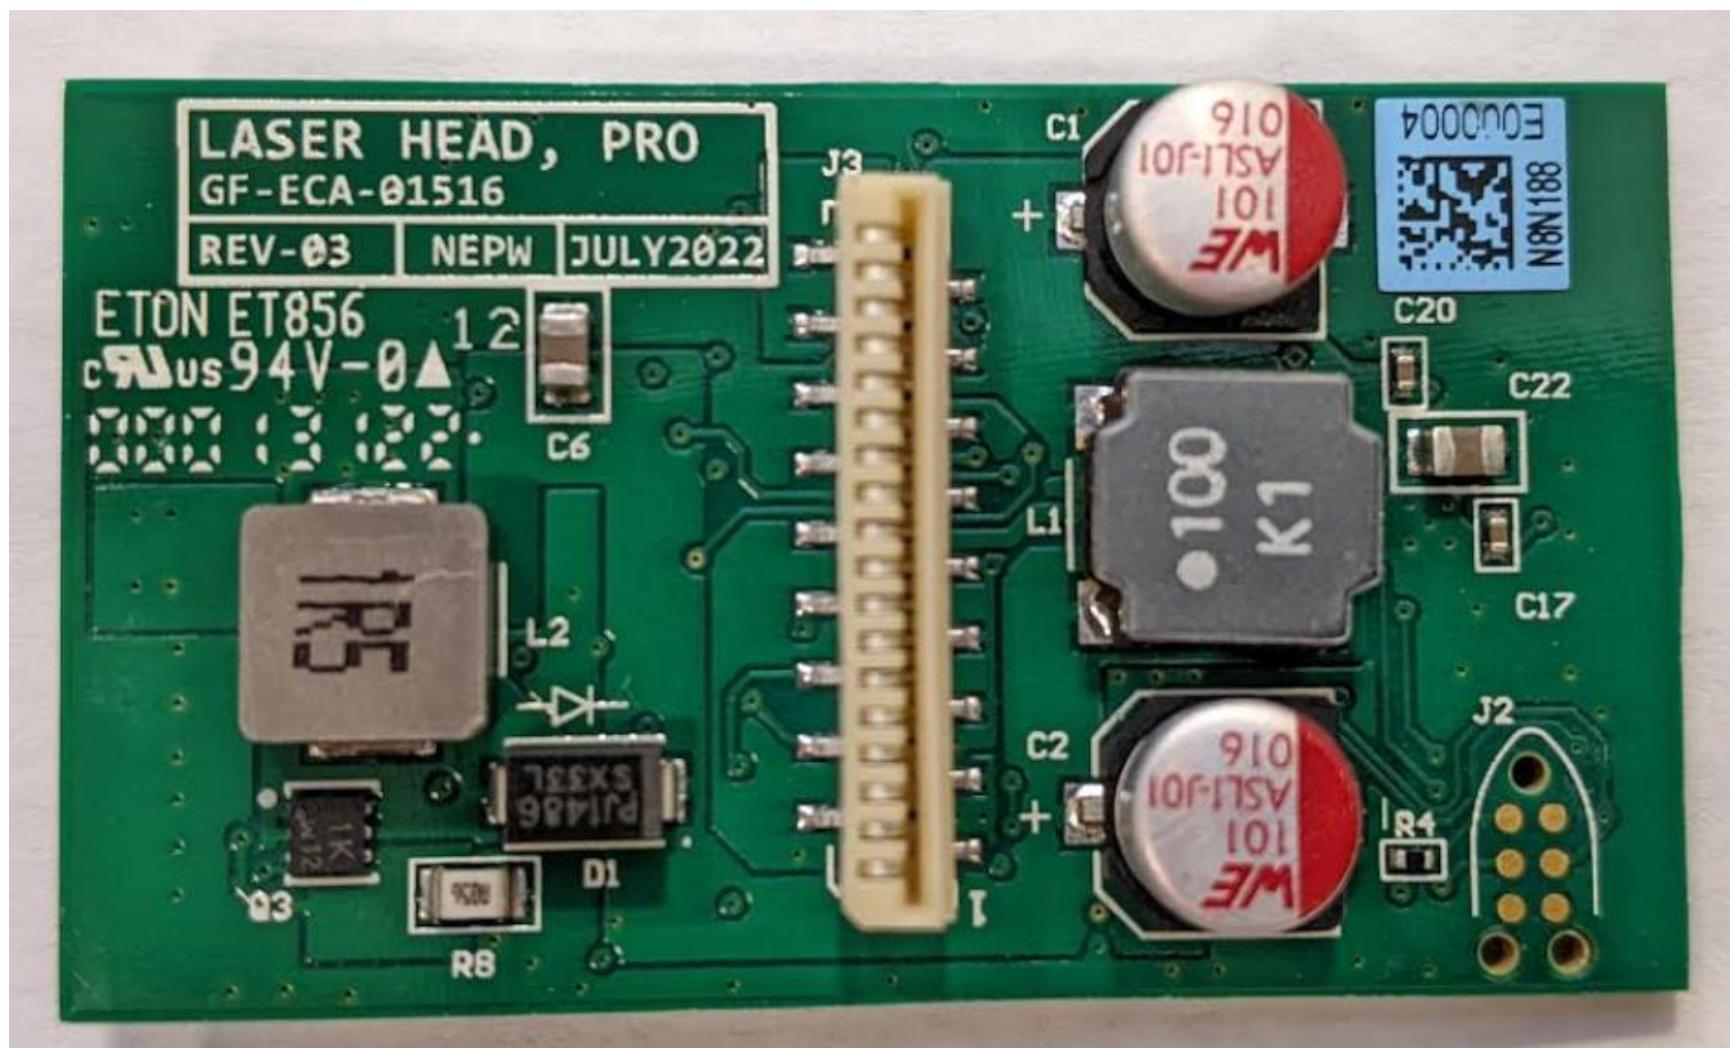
GF-PCA-00188- Rigid head PCBA- Top
